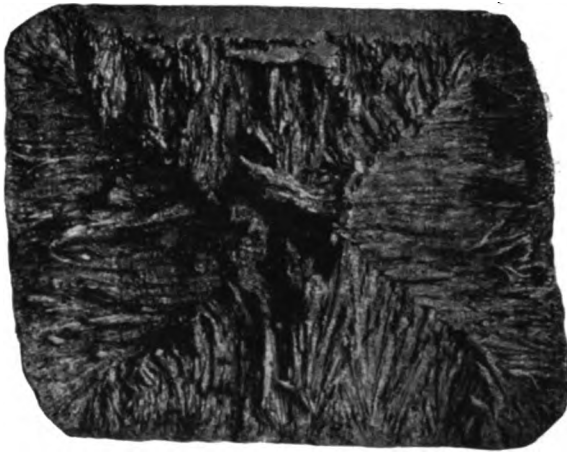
ETCHED SECTION OF INGOT SHOWING COLUMNAR
